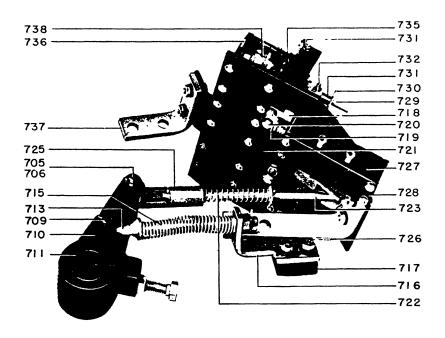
Impact Trip Device For All Mechanisms (Ref. 702)
